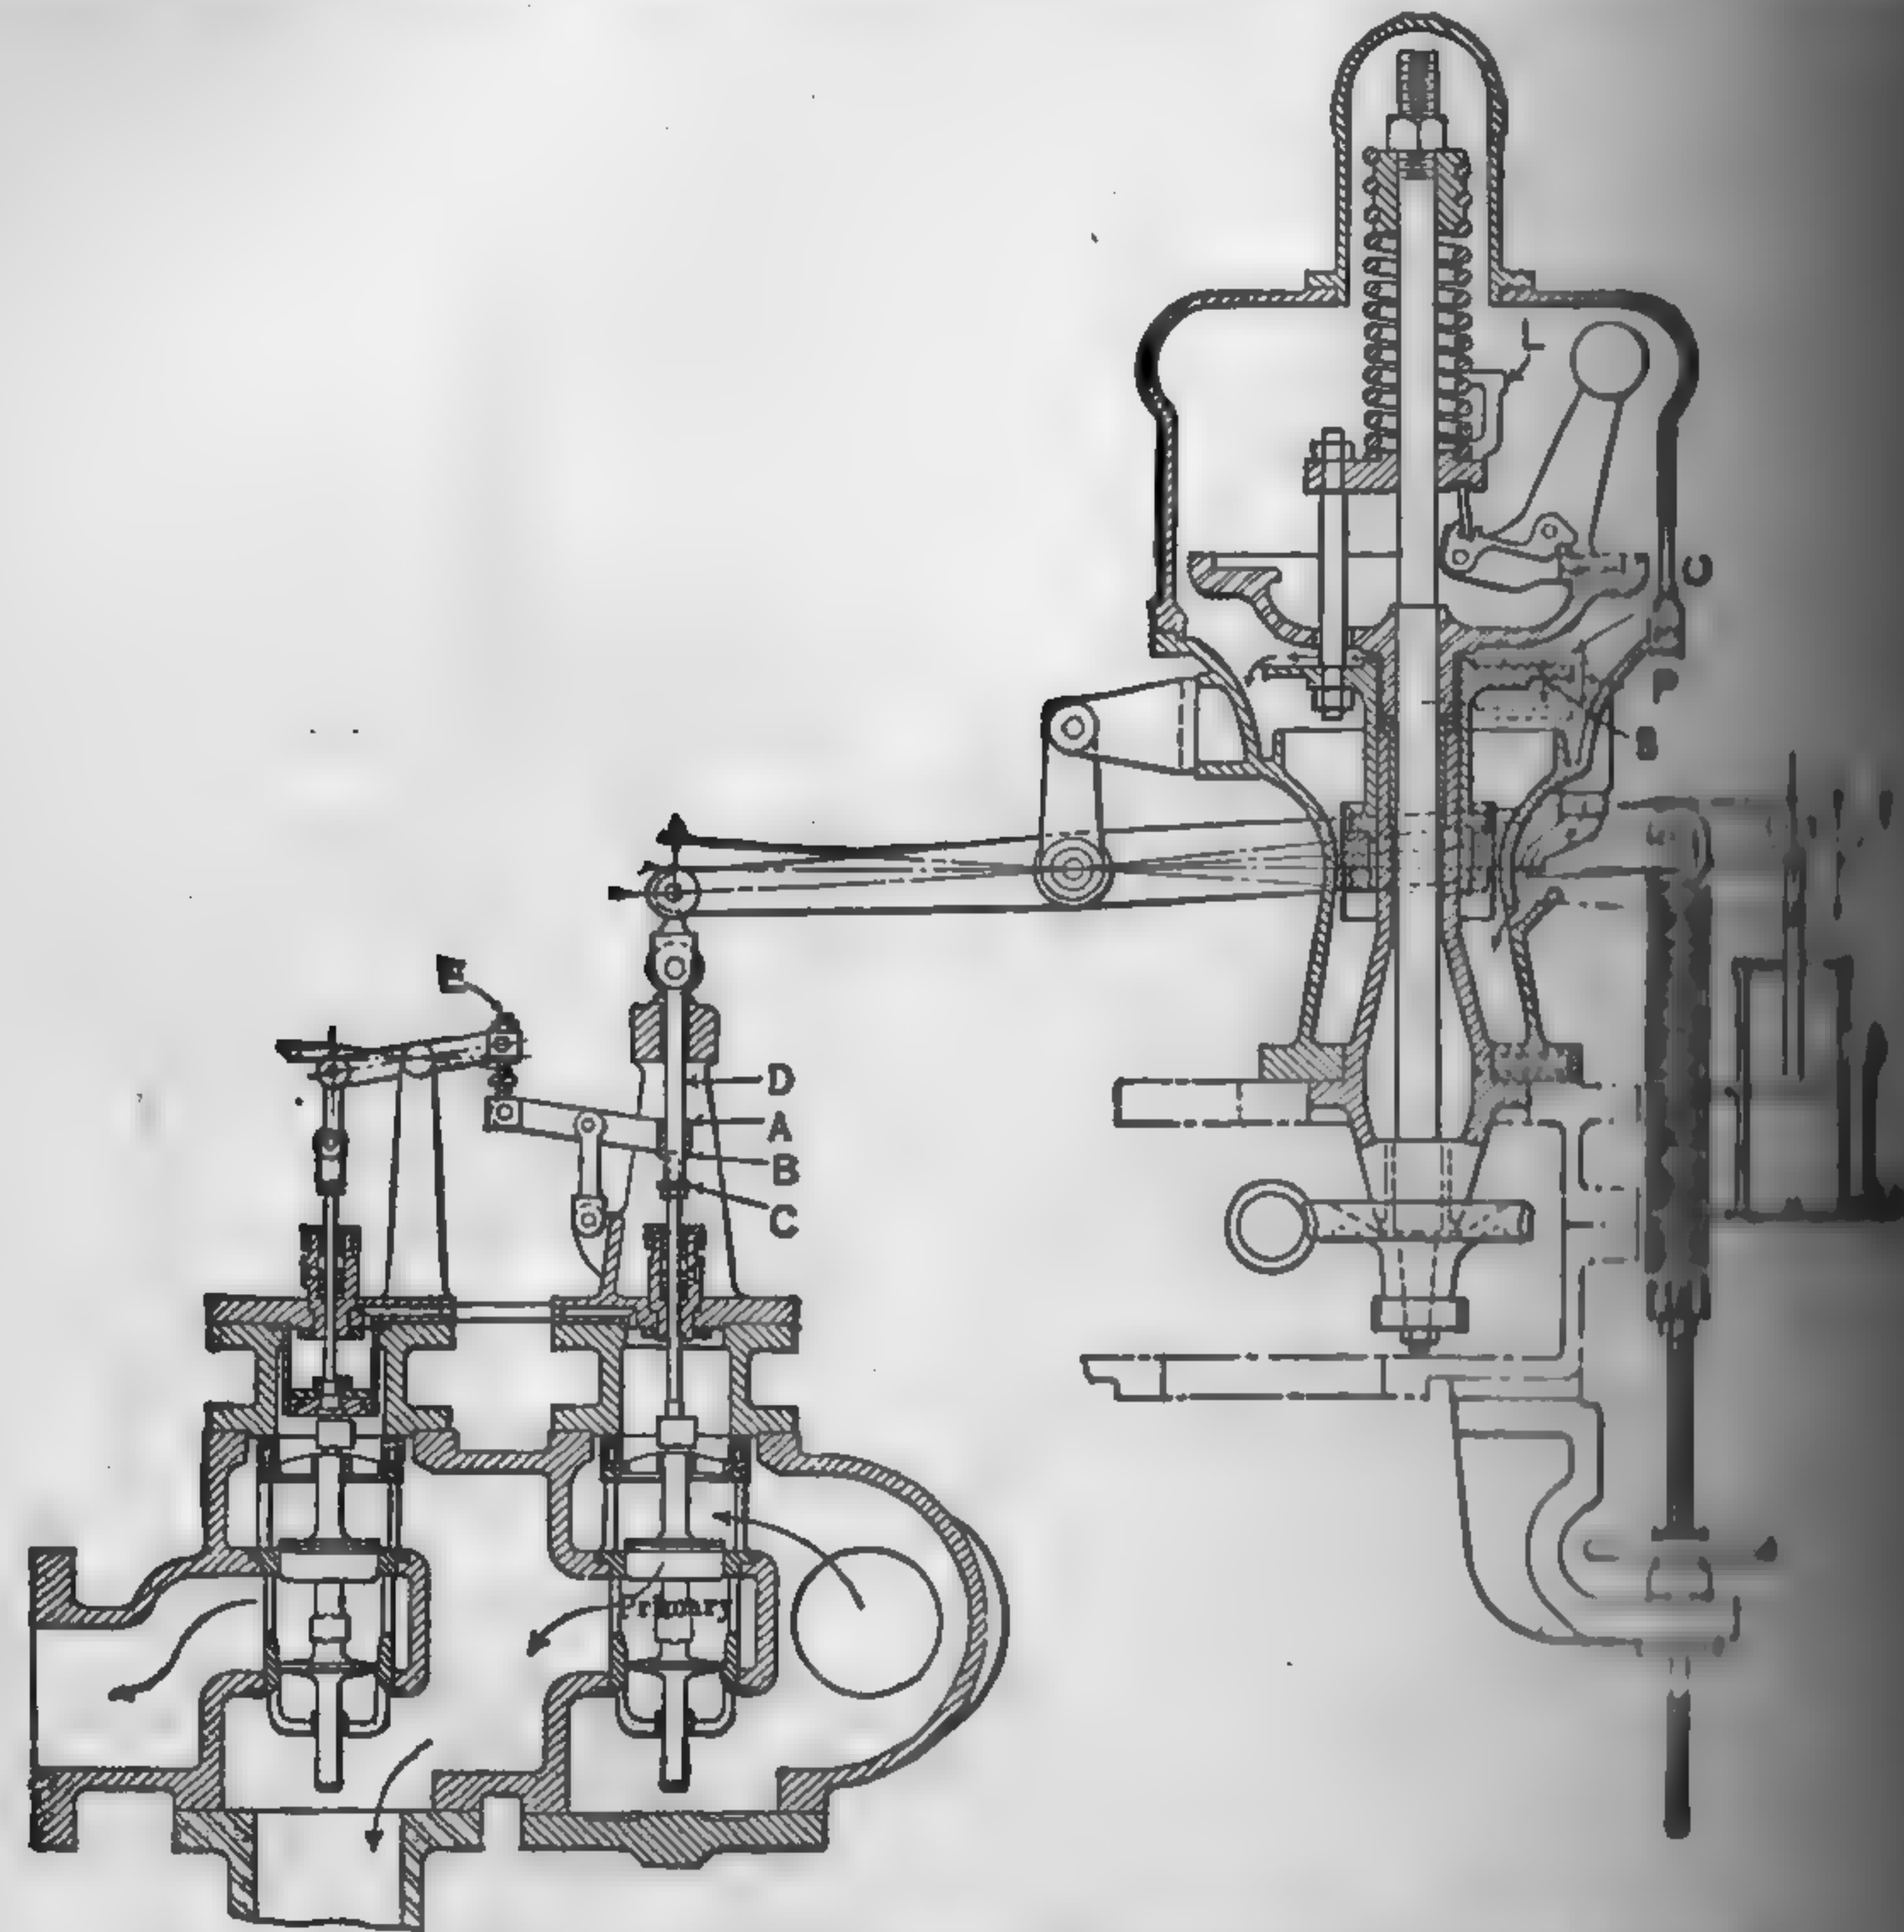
Assembly of Governor Mechanism, Direct Control.
